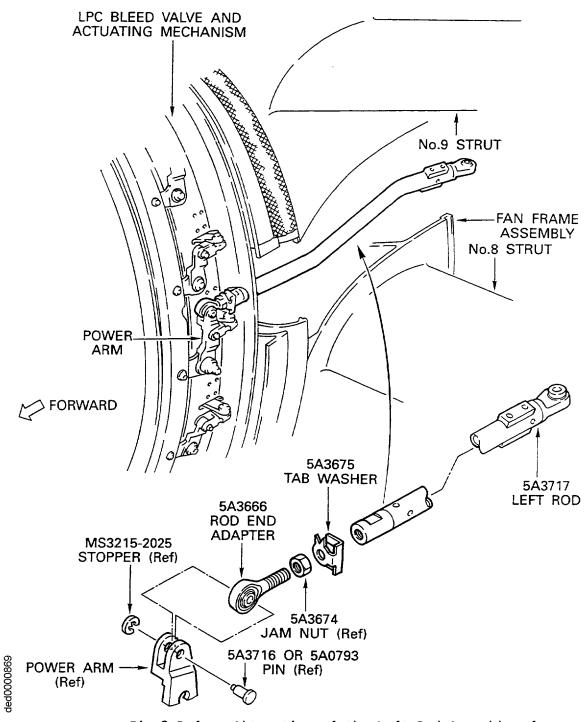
Before Alteration of the Left Rod Assembly of LPC Bleed Valve
